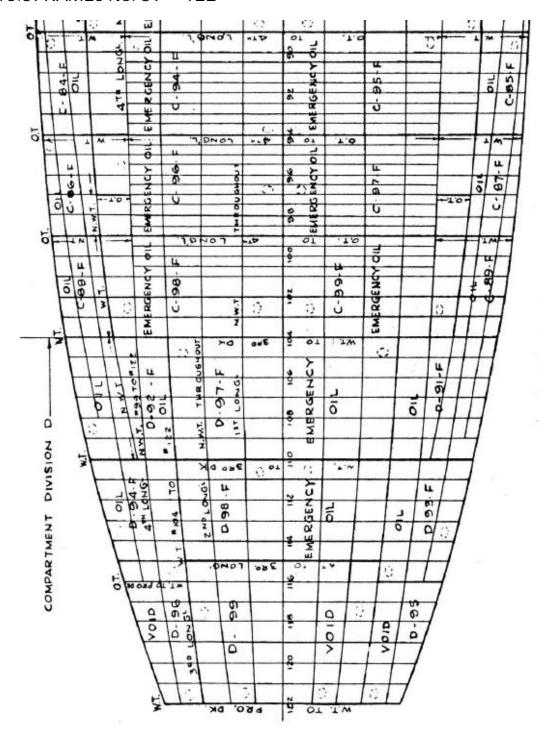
Inner Bottom Tankage (Frames No. 89 – 122)
